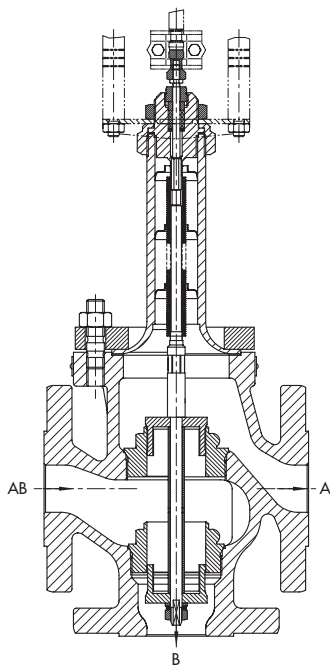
· Type 3535 Three-way Valve for Heat Transfer Oil plug arrangement for diverting service
